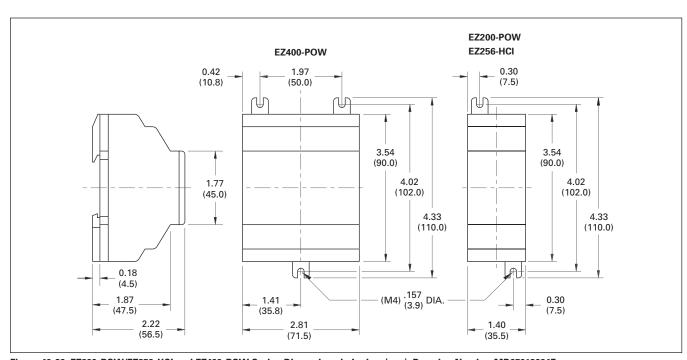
EZ200-POW/EZ256-HCI and EZ400-POW Series Dimensions in Inches (mm), Drawing Number MD05013004E
